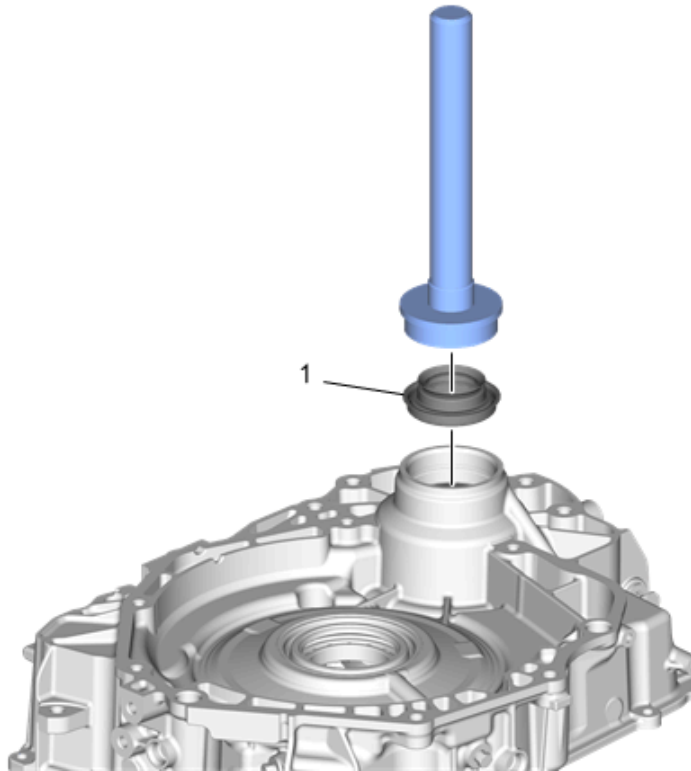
Front Wheel Drive Shaft Oil Seal - Right Side
